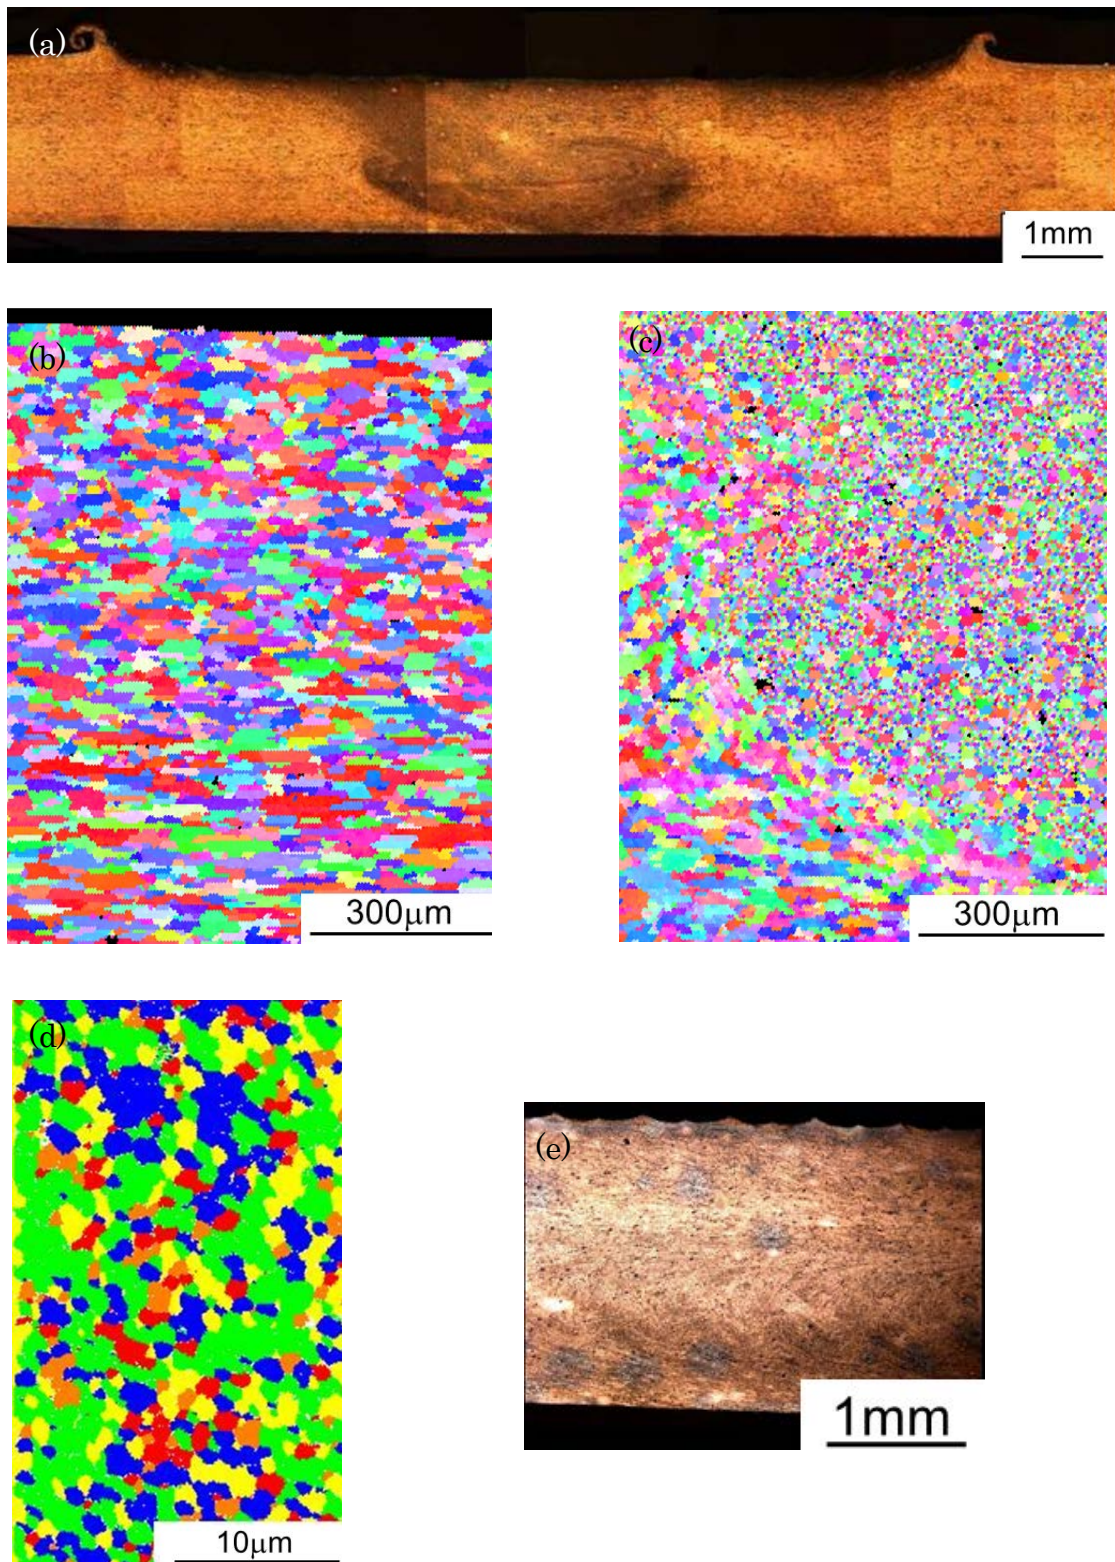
Metallographic observations of sections for weld A (a) Section perpendicular to the welding line, (b) Base Material, (c) TMAZ/SZ boundary, (d) SZ, (e) Section parallel to the welding line
